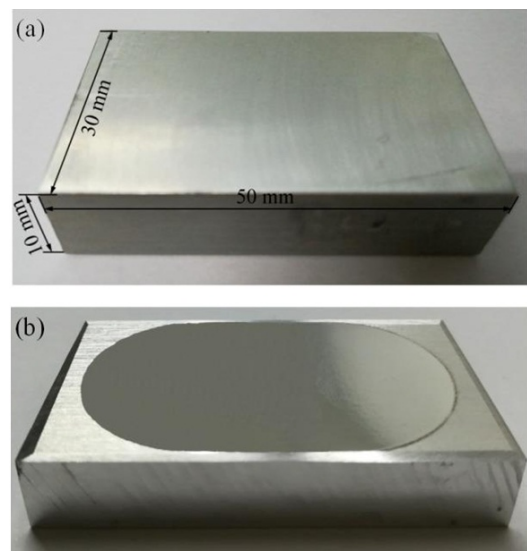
Photographs of 7075 aluminum alloy samples: (a) original sample; (b) burnished sample.
